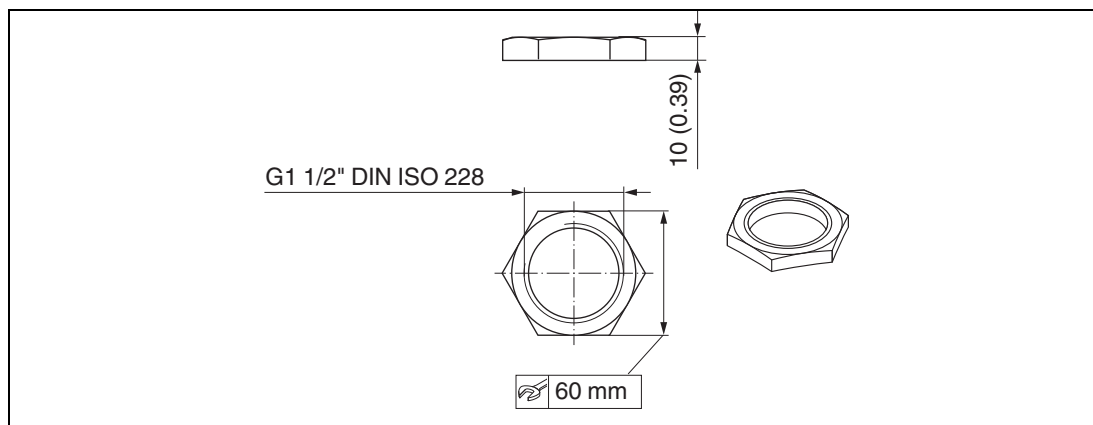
Dimensions of securing nut, engineering unit: mm (inch)
